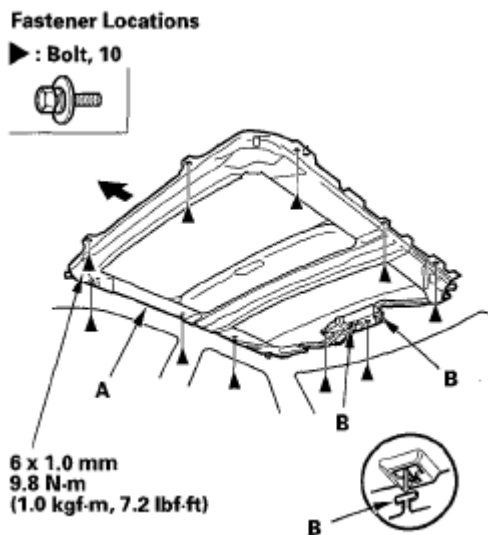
Identifying Frame Fasteners With Torque Specifications
